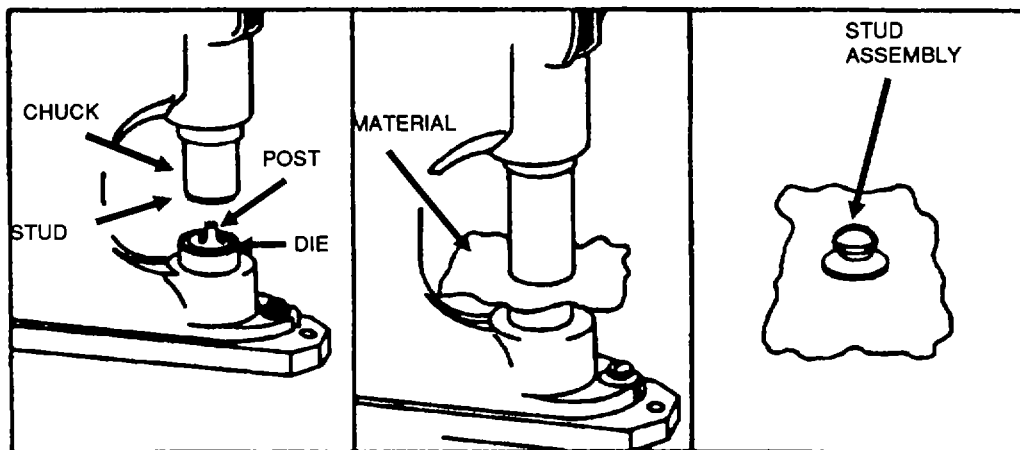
B. Seating A Snap Fastener Typical (Stud Assembly).
